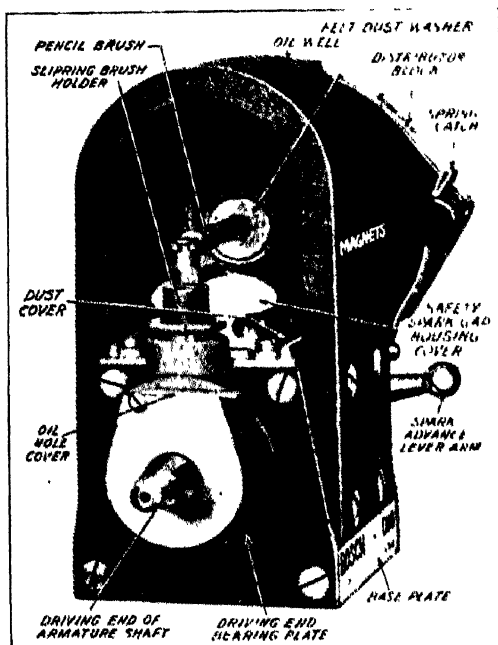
Drive-end view of Bosch magneto, model DU1.
